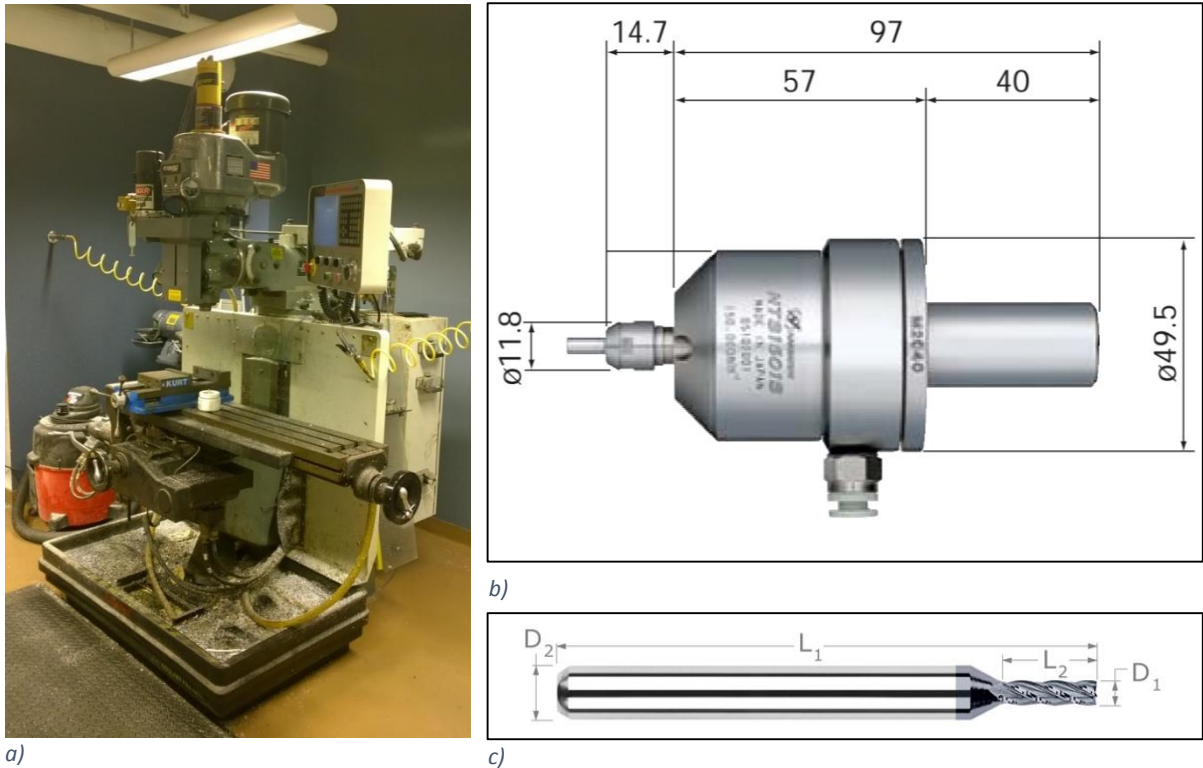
CNC Milling apparatus. a) Conventional Bridgeport CNC Mill; b) High Speed Spindle from NSK. Measures in mm; c) Miniature Endmill cutter. This tool has a 3.175mm shank with 1.5875mm cut diameter. Adapted from [62]
